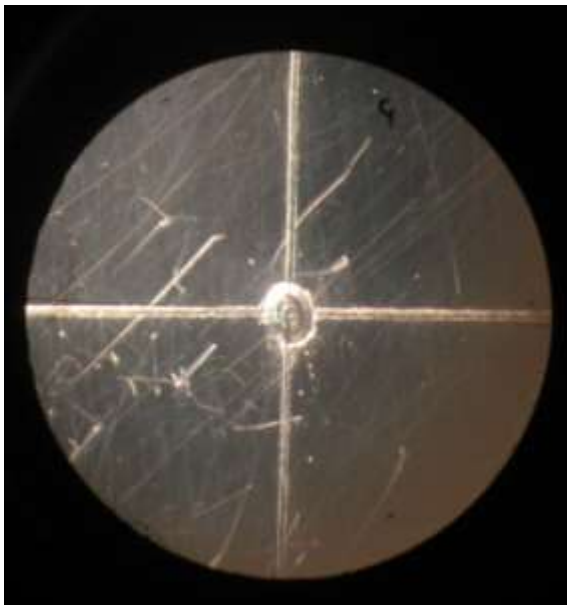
Checking the sign made by the alignment end mill (1-SINTCTC)
